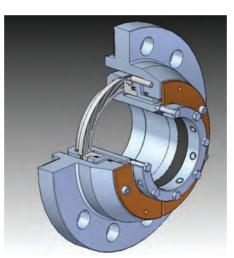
Cutaway view of steam turbine gland shows its dry gas seal heritage
